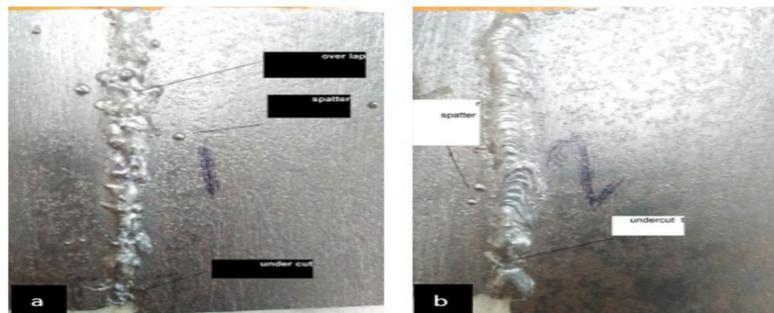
Illustrate welding defects at (a) A=250, S=112 (b) A= 250, S=118.
